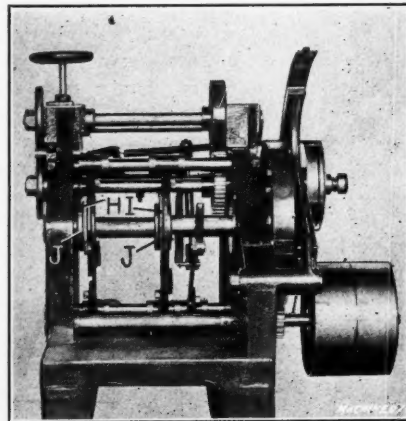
End View of Machine showing Cams that control Diameter and Pitch of Spring
